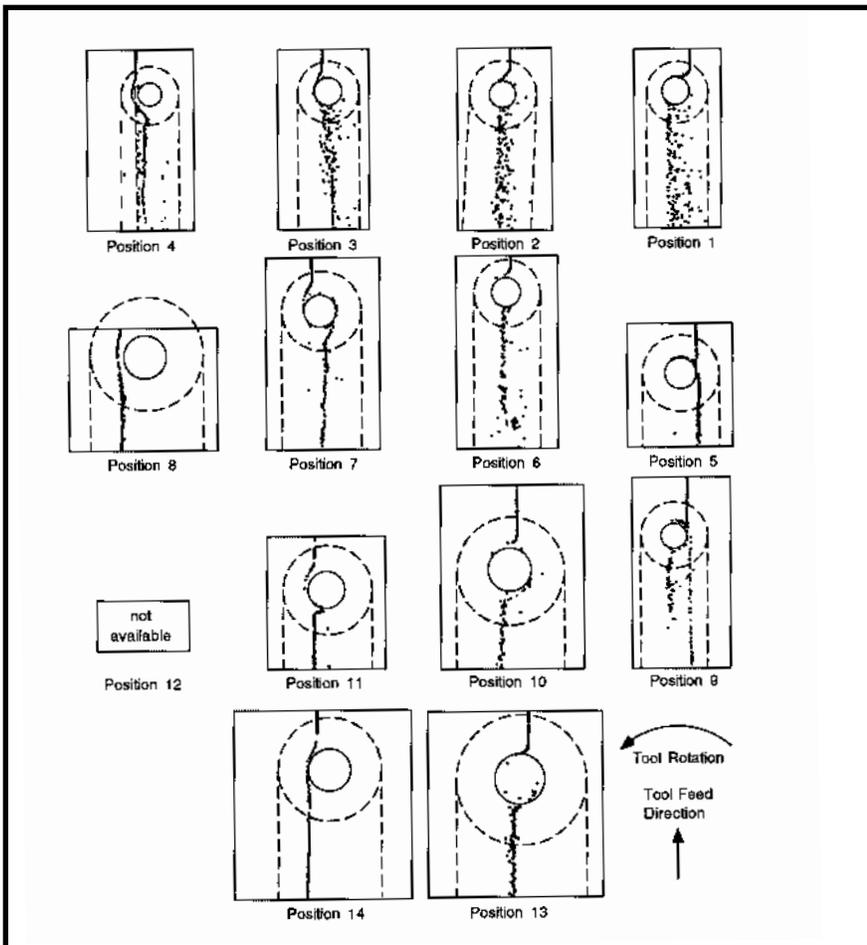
Drawings generated from each of the side view radiographs for the 6061 welds are shown here.
